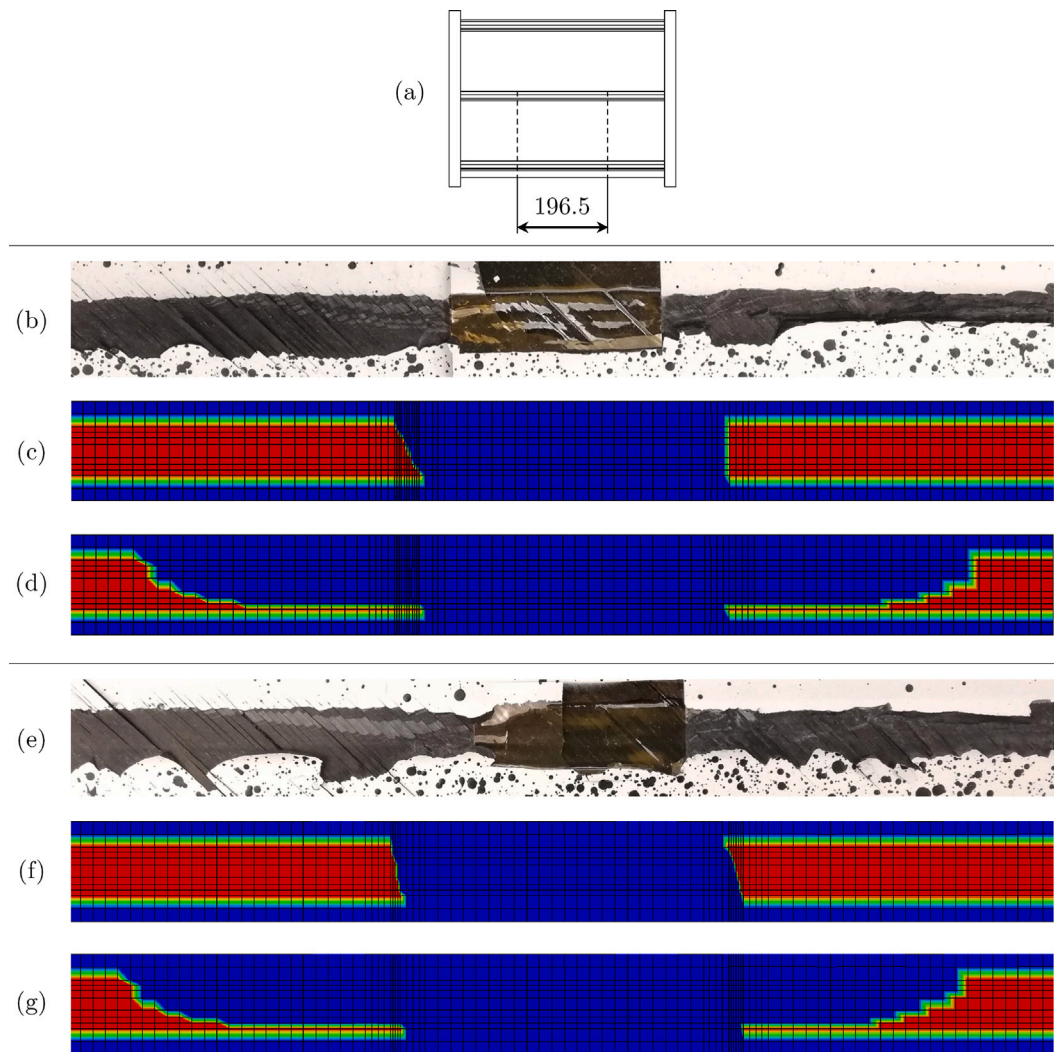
Top view skin-stringer interface: (a) Interface area of interest; (b) test panel 1 fracture surface; (c) FE panel 1 initial damage; (d) FE panel 1 at 156 kN; (e) test panel 2 fracture surface; (f) FE panel 2 initial damage; (g) FE panel 2 at 156 kN.
